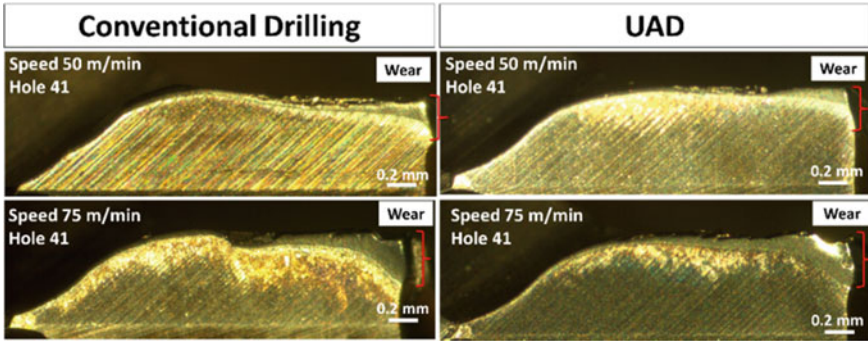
Tool wear images just right after CFC drilling and before drilling titanium
